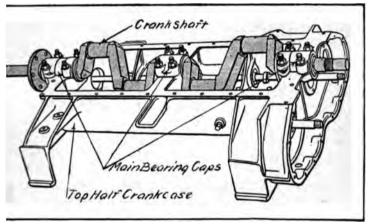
Showing Method of Supporting Crankcase to Provide Access to Connecting Rods and Crankshaft Bearings.
